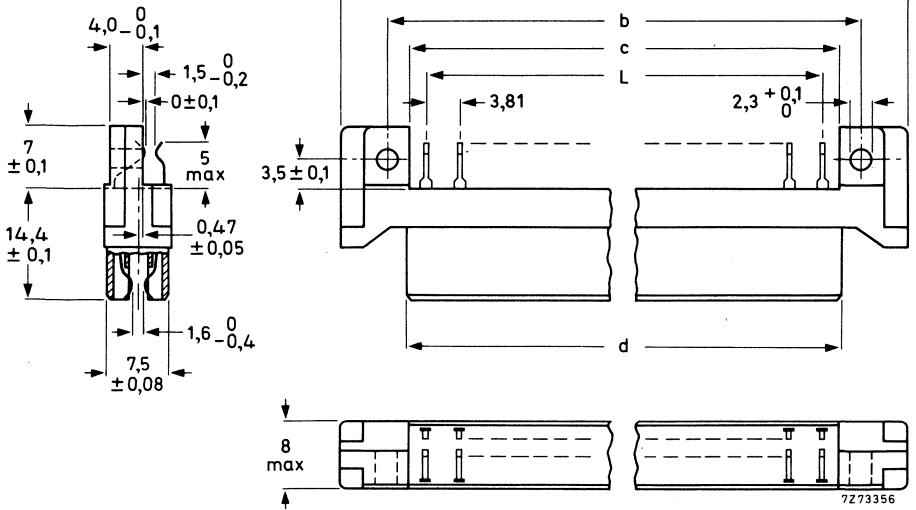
Board part. See Table 1 for dimensions a, b, c, d and L.
